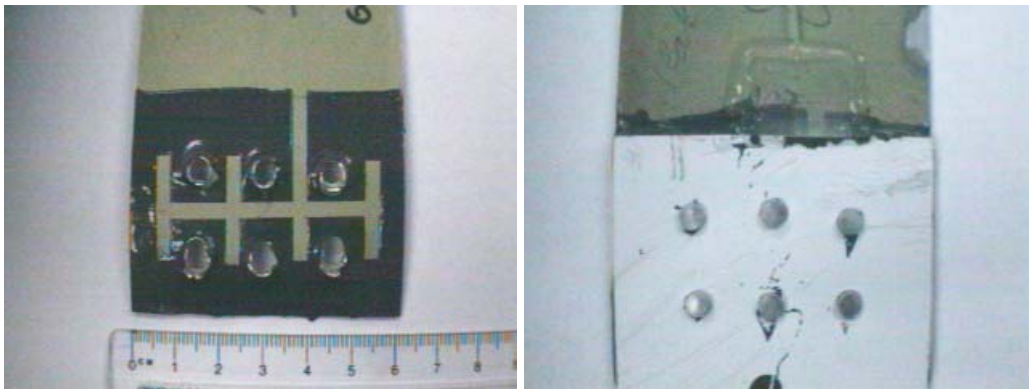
Single plate of lap joint illustrating PR-1440 sealant and cavity - note exit of cavity (left).
